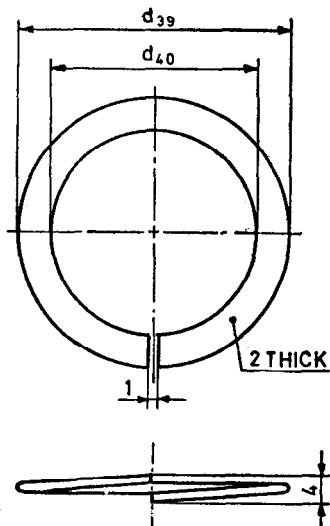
GASKET RING (FOR 36 kV/630, 1 000, 2 000 AND 3 150 A RATING)
